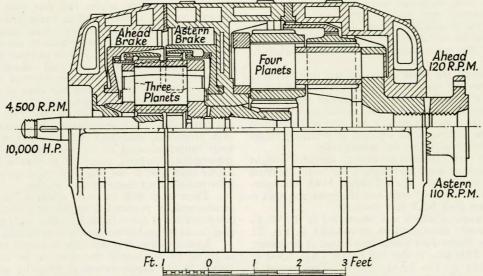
,000 h.p. main propulsion reverse reduction gear: 4,500/120 r.p.m. ahead and 110 r.p. m. astern
